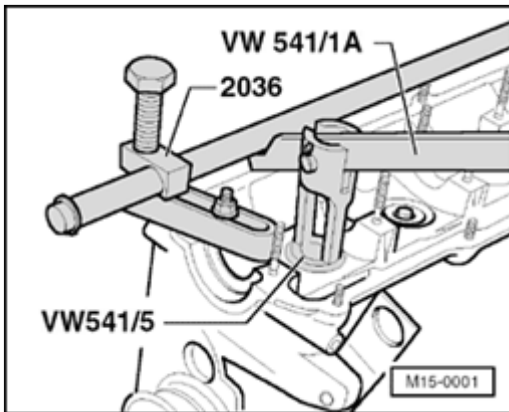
Identifying Assembly Appliance 2036, Assembly Lever VW 541/1A & Thrust Piece VW 541/5
